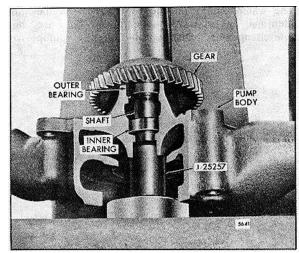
Pressing Gear on 6V and 8V Pump Shaft using Tool J 25257
